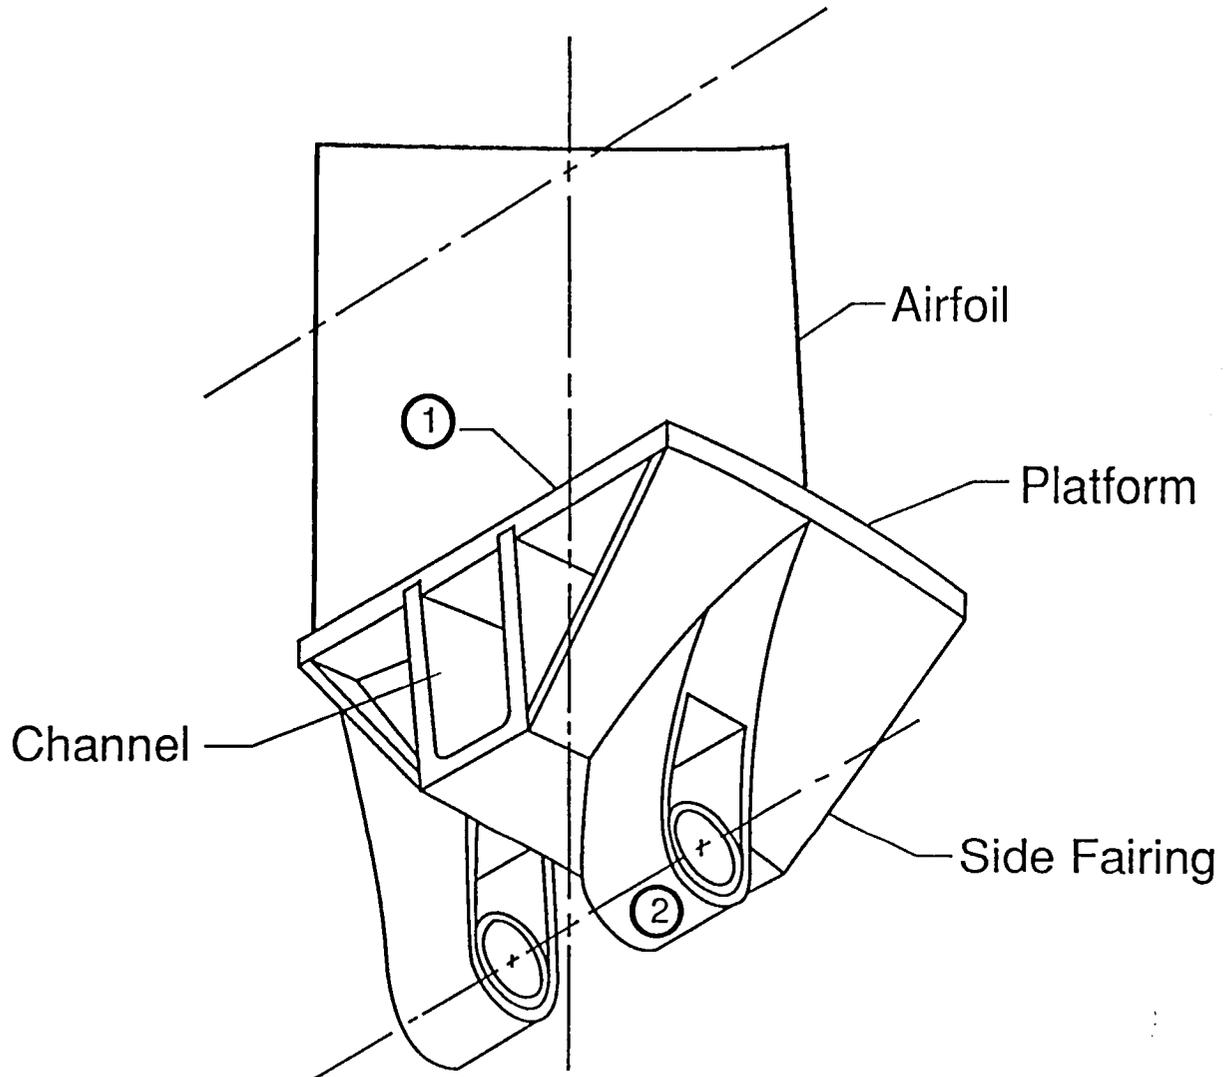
NTF fan blade assembly. Point 1 is at surface of root of blade, point 2 is pin wraparound laminate outer surface.
